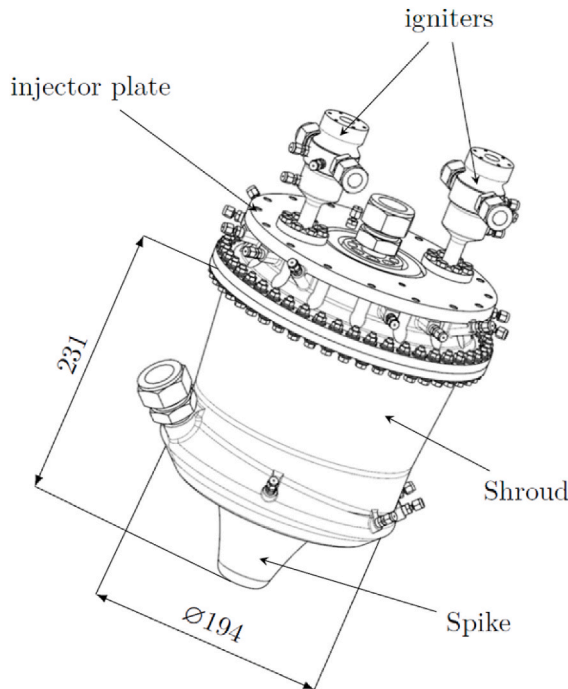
DemoP1 drawing: the dimensions are in mm.
